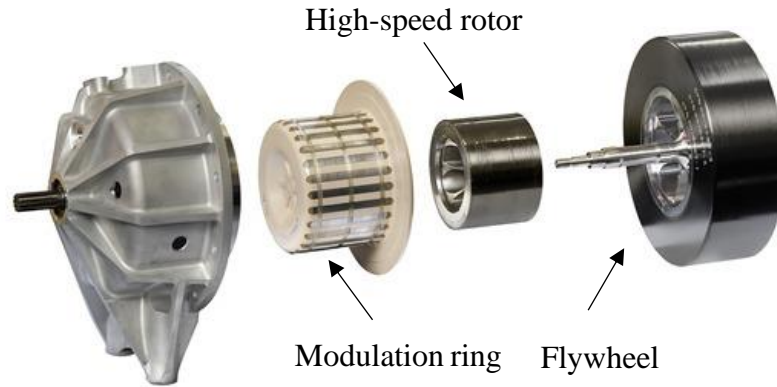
Ricardo's magnetically geared flywheel [38]
